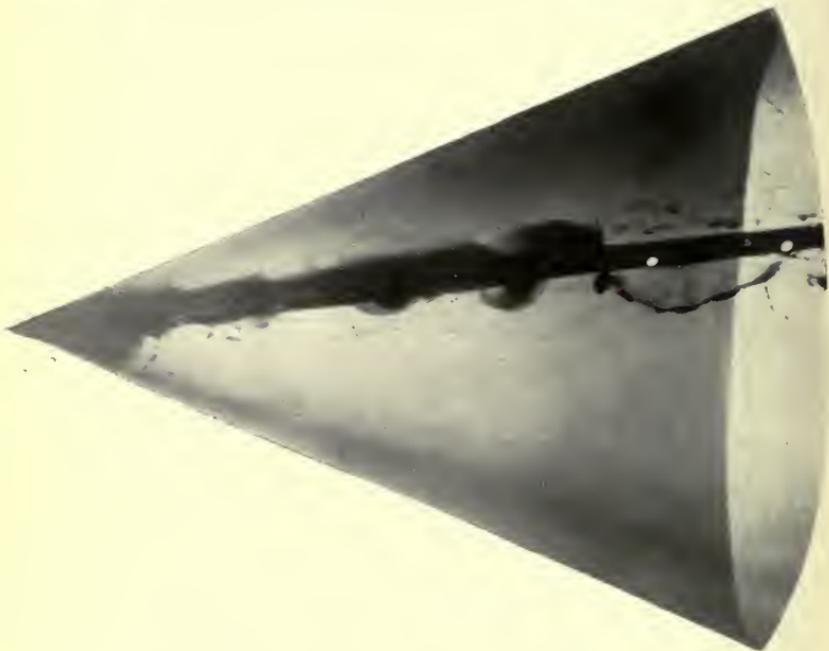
Radiograph of conical end of steel petrol tank of an aeroplane, showing soldered seam and rivets (Knox and Kaye).
